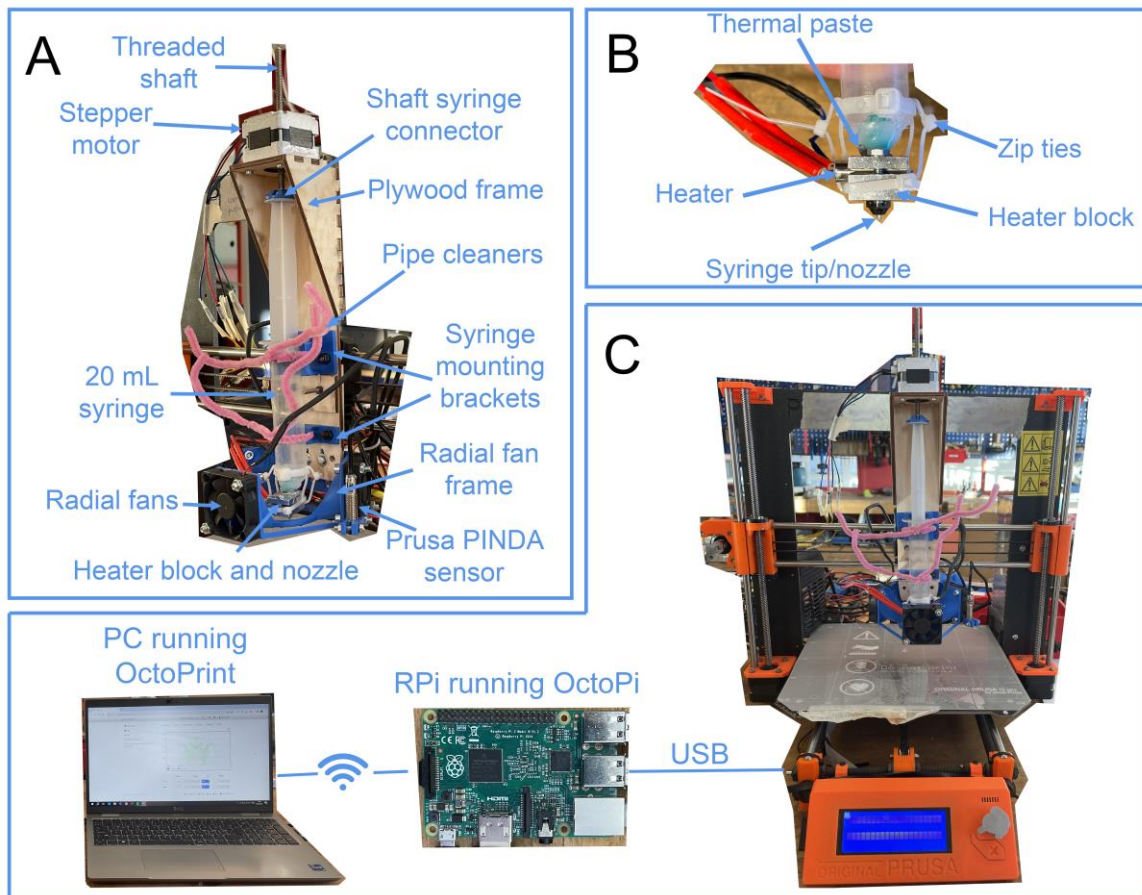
Printer design overview (A) Extruder construction (B) Hot-end assembly (C) Printer control overview
